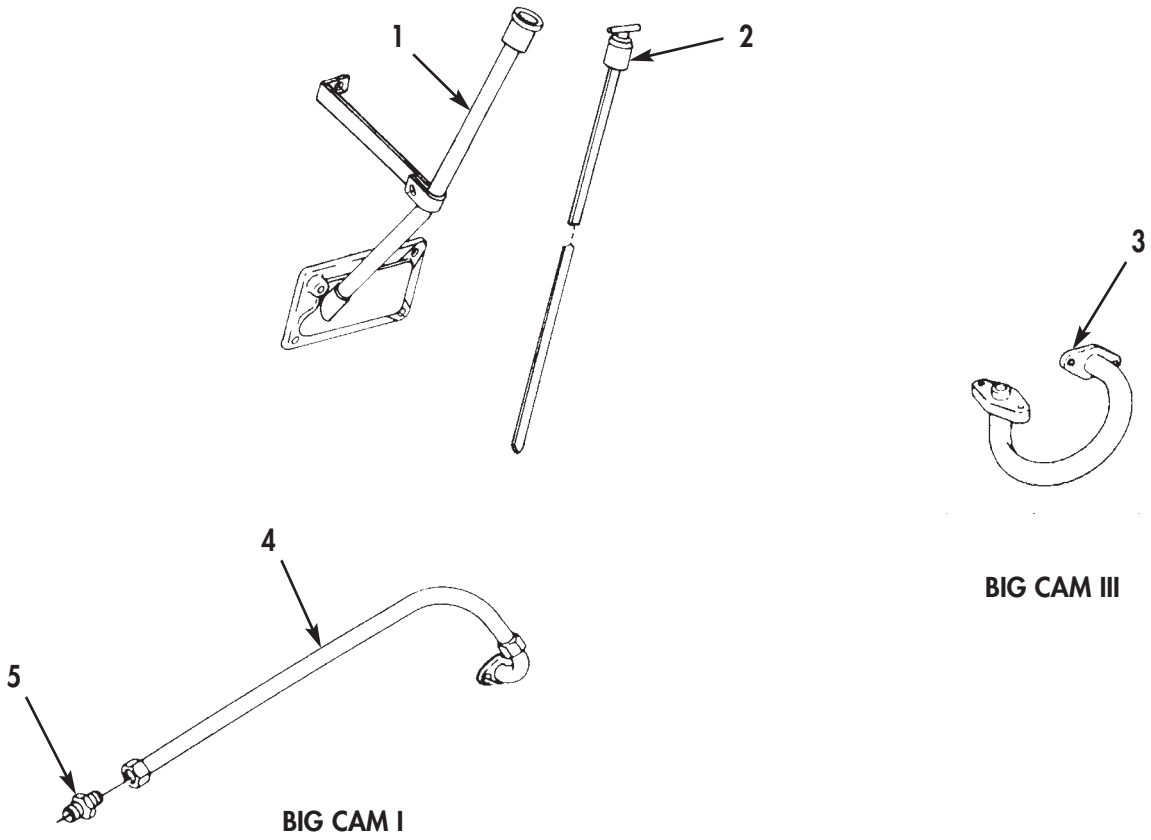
Oil Dipstick, Oil Dipstick Tube, and Oil Suction Tubes Cleaning and Inspection.
